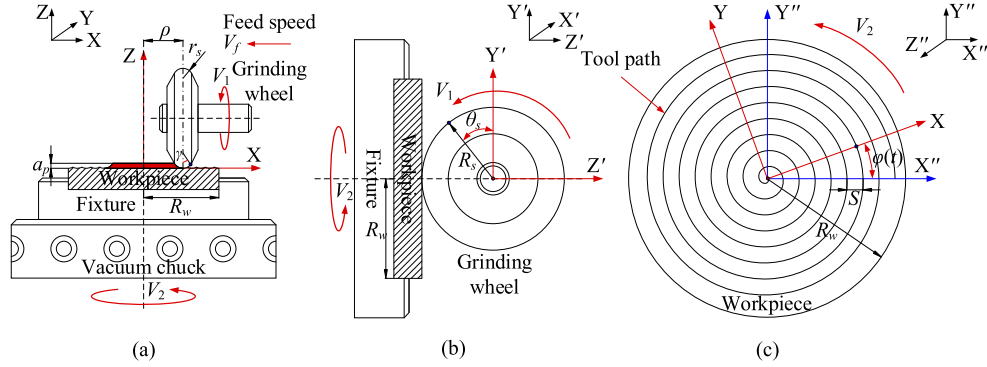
Definition of the wheel-workpiece coordinate systems and the coordinate transformation in ultra-precision grinding (a) workpiece coordinate system, (b) grinding wheel coordinate system, (c) global coordinate system
